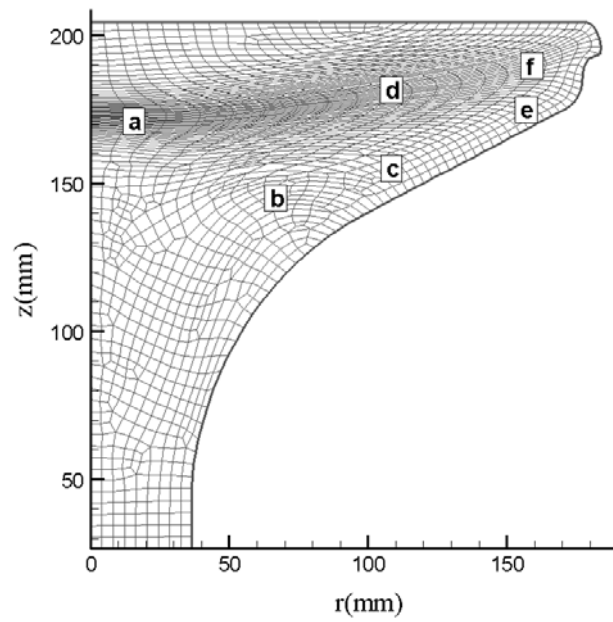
Inspection positions at the section of exhaust valve head (60MC)
